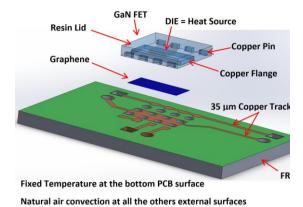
3D geometry (exploded view) of the assembled PCB with boundary conditions set in the FE model.
